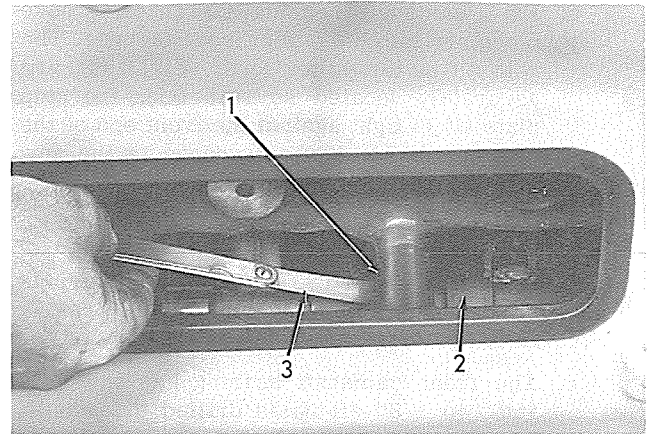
Checking Camshaft Bearing Clearance (T-20215)
